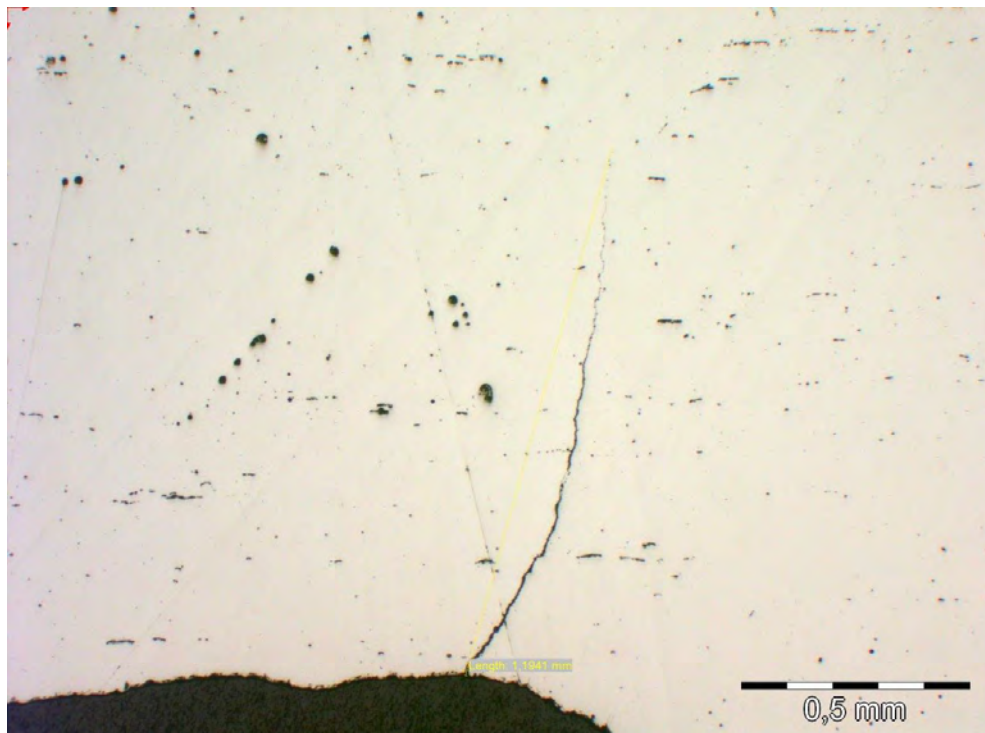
Cut five in crack at segment B, first ridge on barrel no. SFK 0120-A
